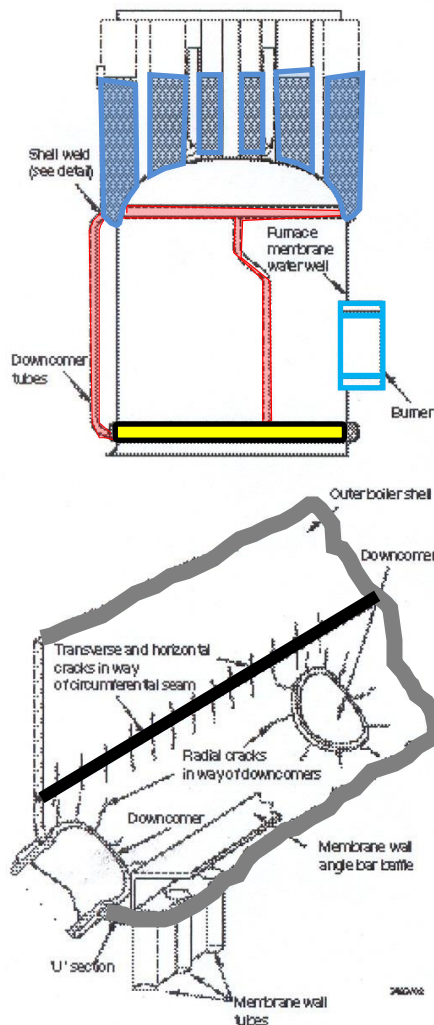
Typical examples of cracks in way of main circumferential and vertical seams
